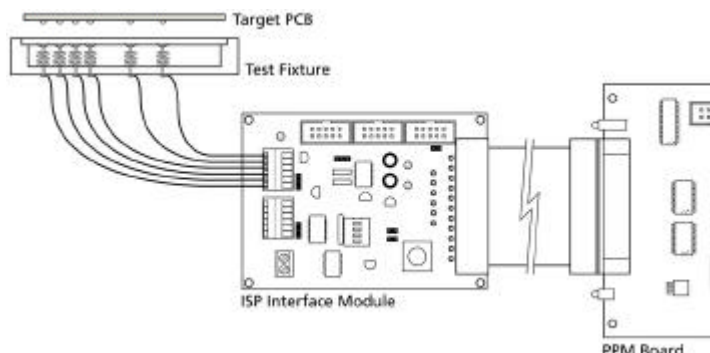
ISP Interface Module connected to a Bed-of-Nails Test Fixture via connector J4
